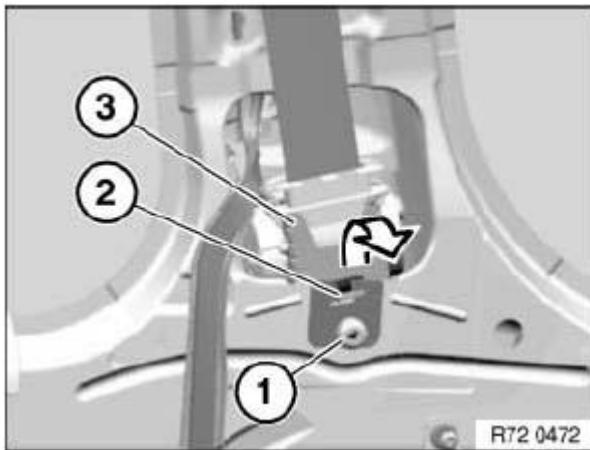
Identifying Retaining Screw, Automatic Reel And Coding
